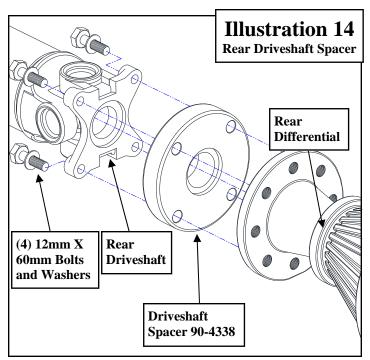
Rotate the driveshaft to check for binding. If it binds the driveshaft must be clearanced by a qualified driveline shop.
